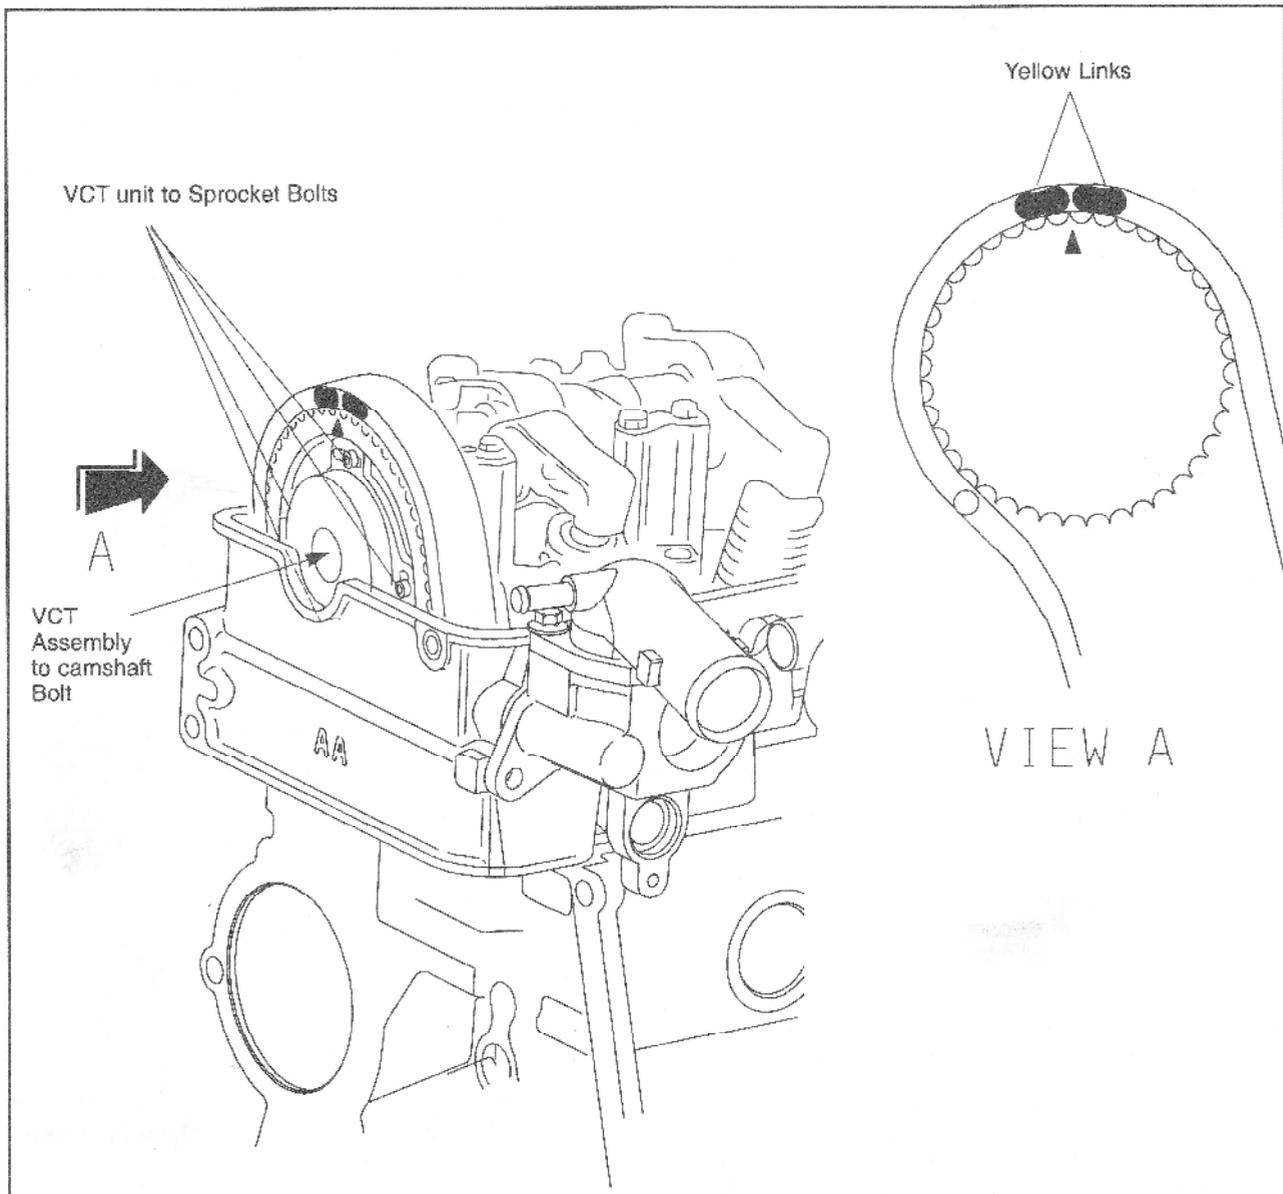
Correct Chain Timing of VCT Unit and Sprocket Assembly
